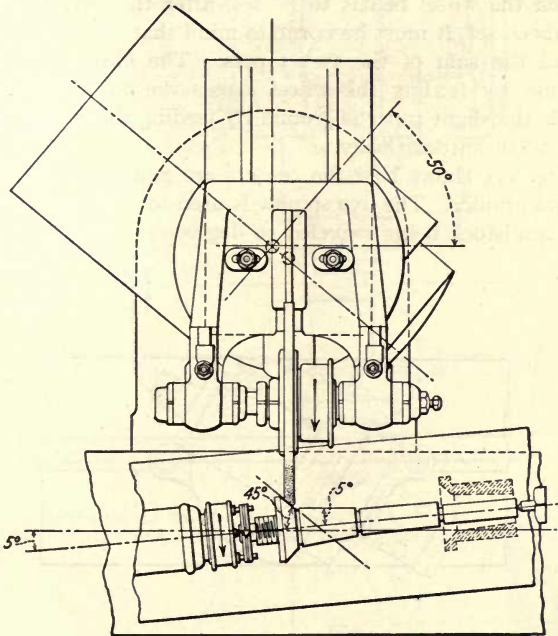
Grinding two tapers at one setting on a Brown & Sharpe universal grinding machine.
